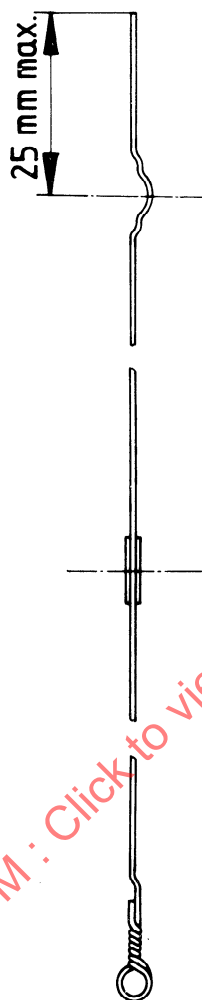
Heald type B, with upper end loop straight to be bent in U-shape; lower end loop, O-shaped
